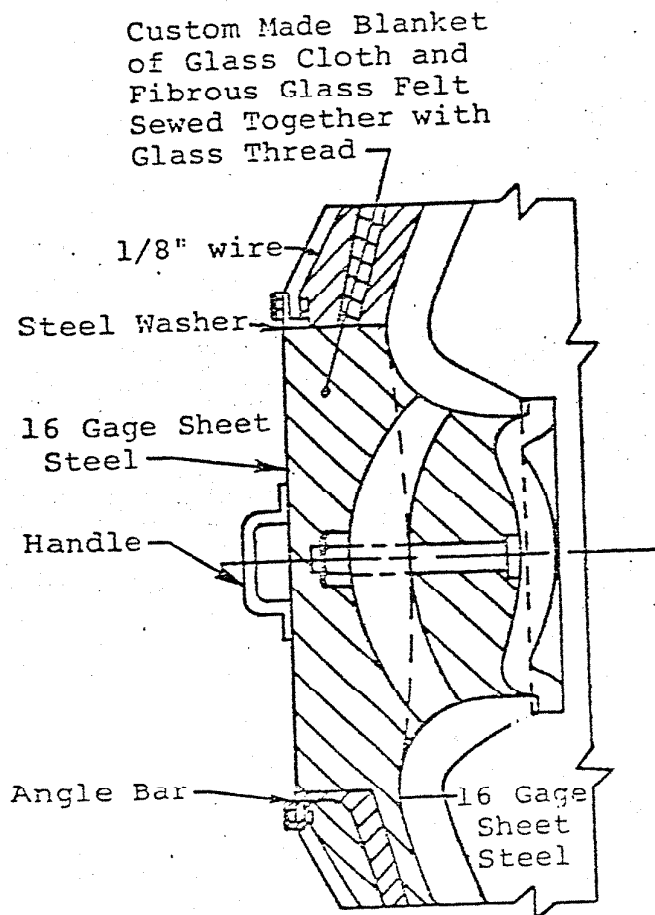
Drum Shell Showing Insulated and Steel-Encased Manhole Cover
